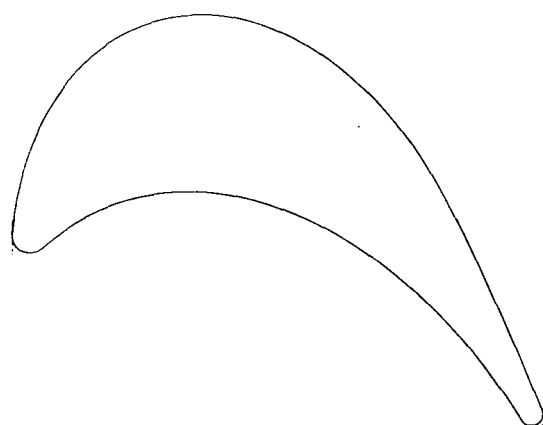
Mark 48-F Turbine Second-Stage Rotor Blade Shape
